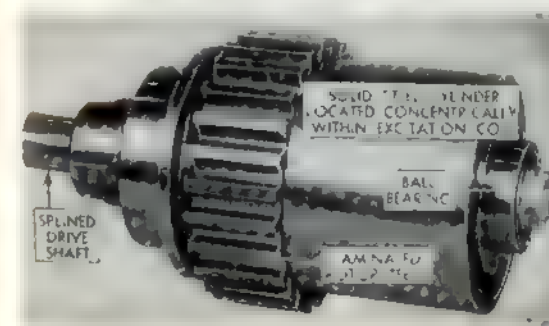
Rotor of a homopolar generator of the type shown in Fig. 6.38.
